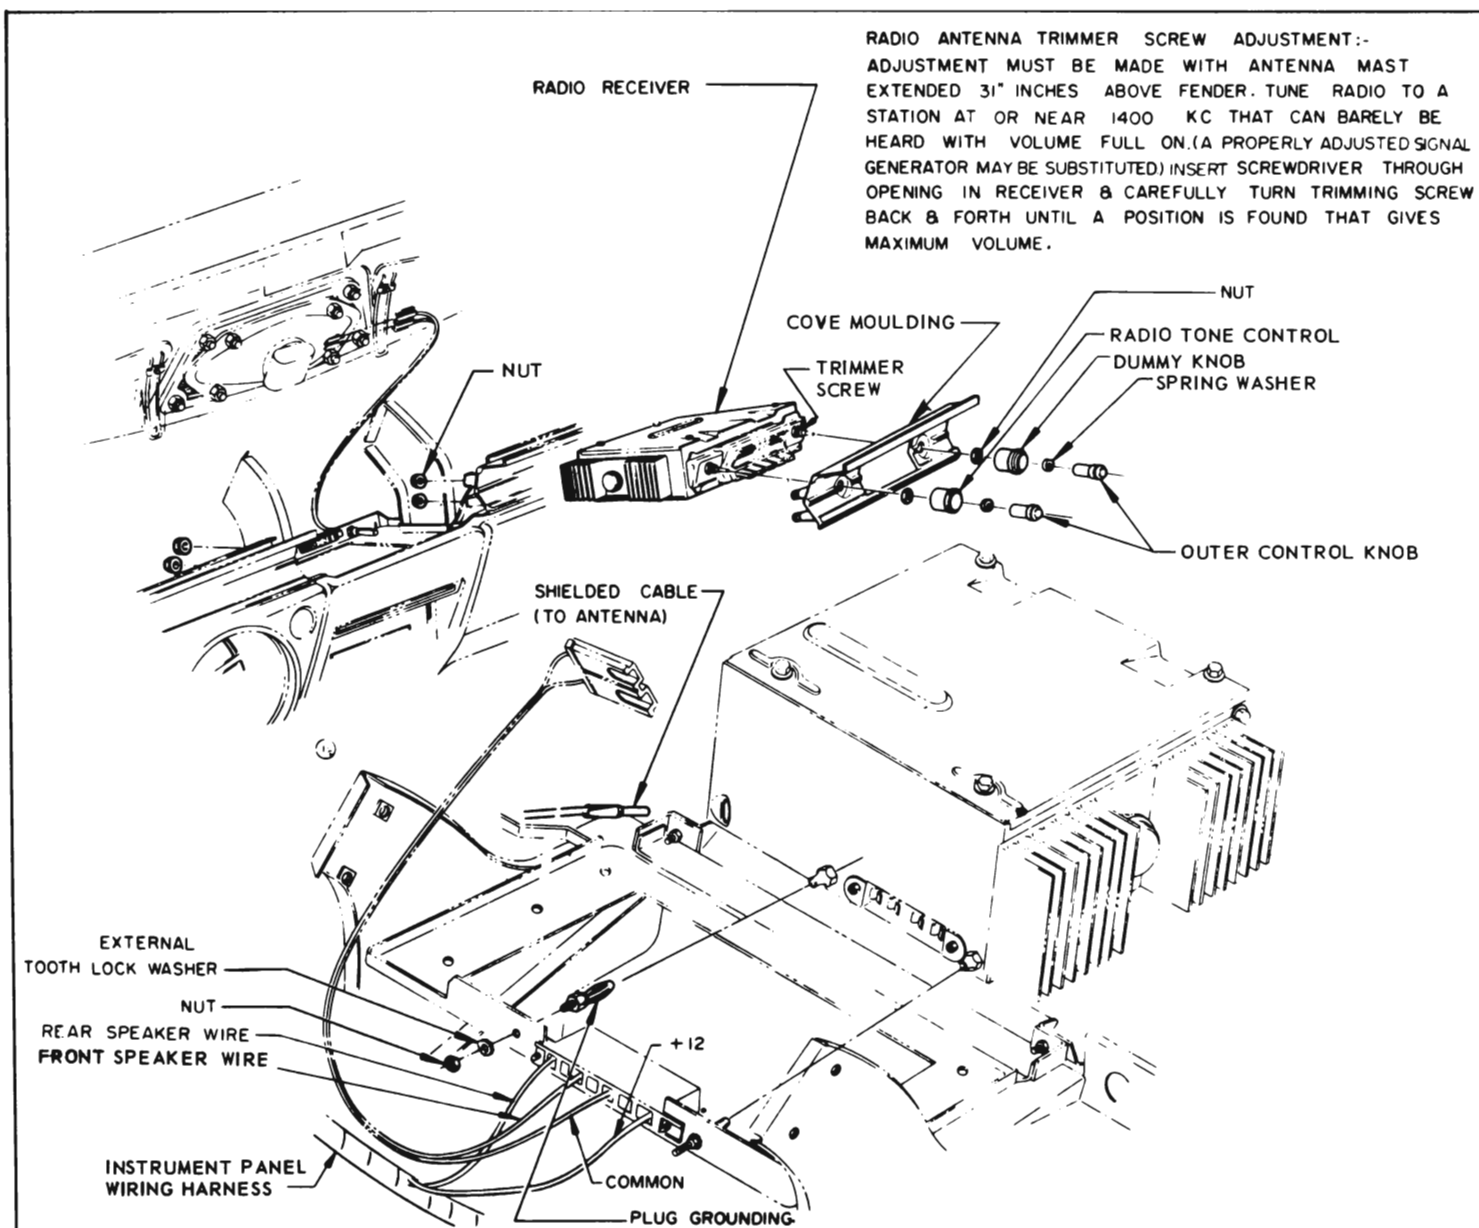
Radio Receiver Installation - 45000, 46000 and 48000 Series
